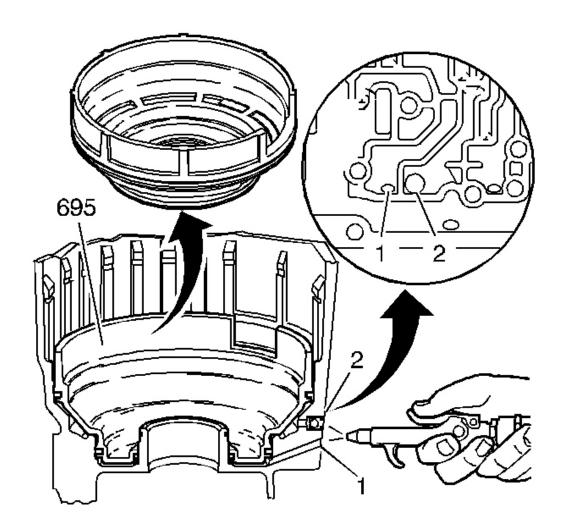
View Of Low & Reverse Clutch Spring Assembly & Retainer Ring Courtesy of GENERAL MOTORS CORP.
